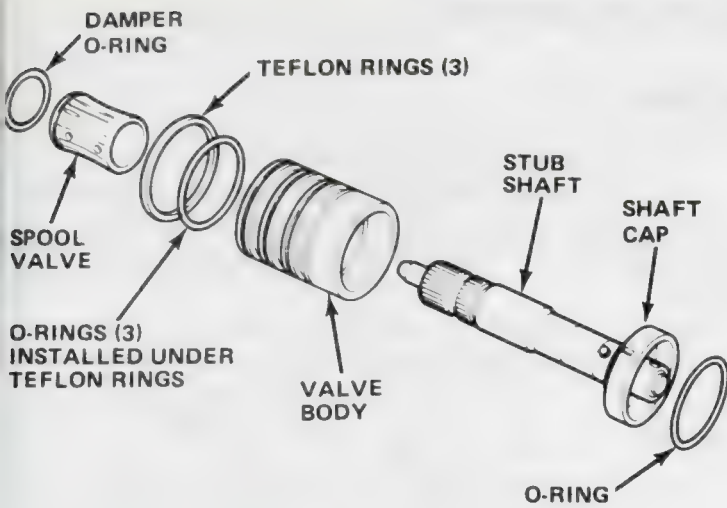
K-24 Valve Body/Spool Valve Disassembly
